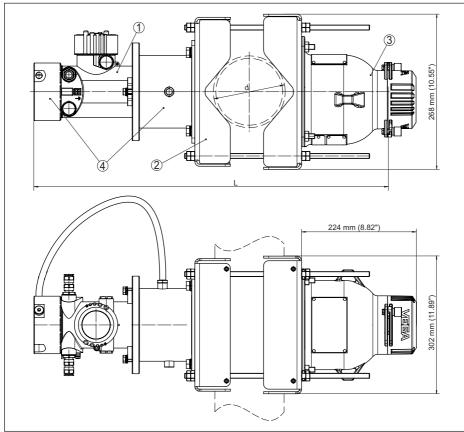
Mounting bracket with horizontally mounted sensor and water cooling (with VEGASOURCE 81, 82)
